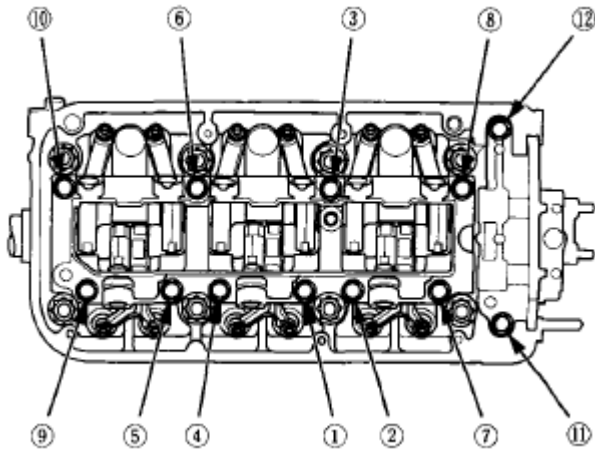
Identifying Rocker Bolts With Tightening Sequence
